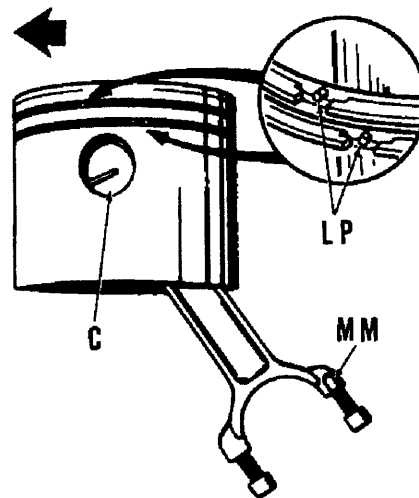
Closed end (C) of piston pin should be on same side of piston as ring locating pins (LP). Connecting rod should be assembled to piston with match mark (MM) on same side of piston as ring locating pins. Arrow on piston dome should be toward port (left) side of engine. Closed end (C) of piston pin will be toward top.
